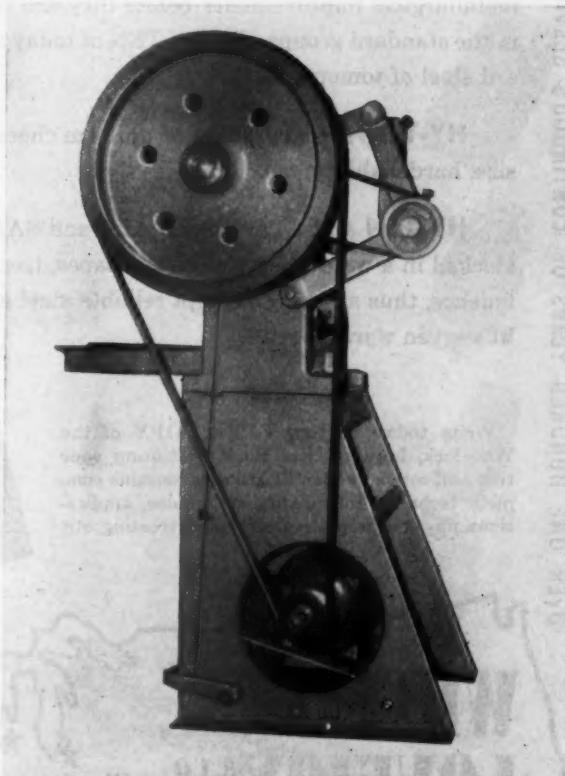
Shoe perforating machine with swing type electric motor pedestal adaptable to take up on belt tension.
